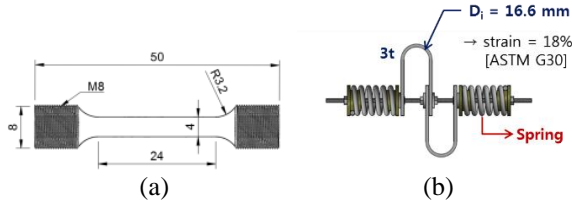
Geometry of the Alloy 182 (a) tensile test specimen, and (b) U-bend specimen.
